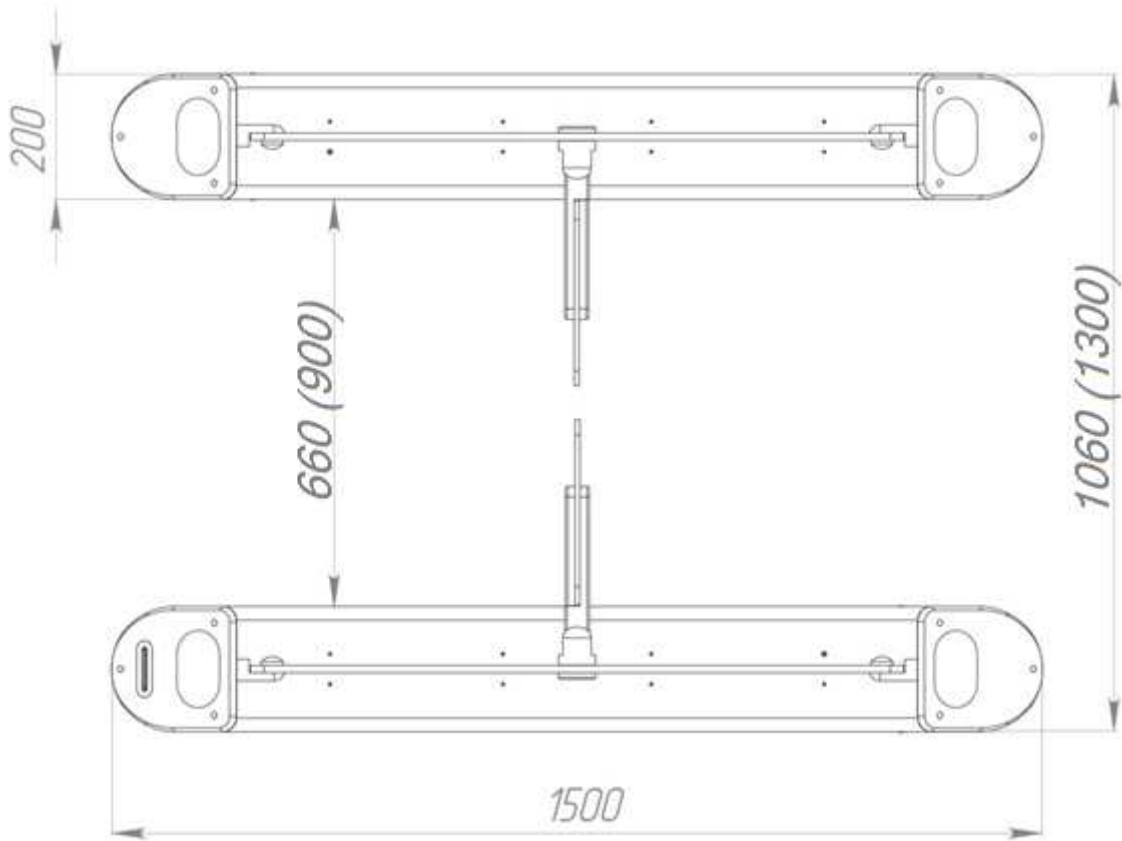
Dimensions of speedgate depending on passage lane (top view)
